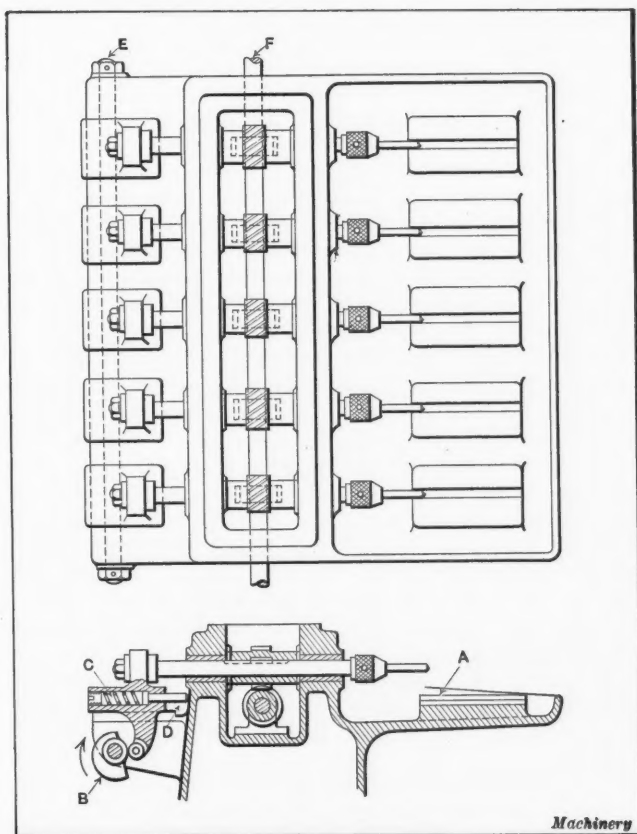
Multiple-spindle Horizontal Drilling Machine with Cam-controlled Quick-return Feed
